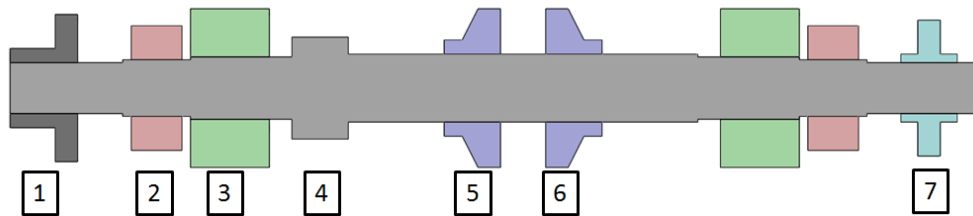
Initial Apollo Rotor Layout with Necessary Components
